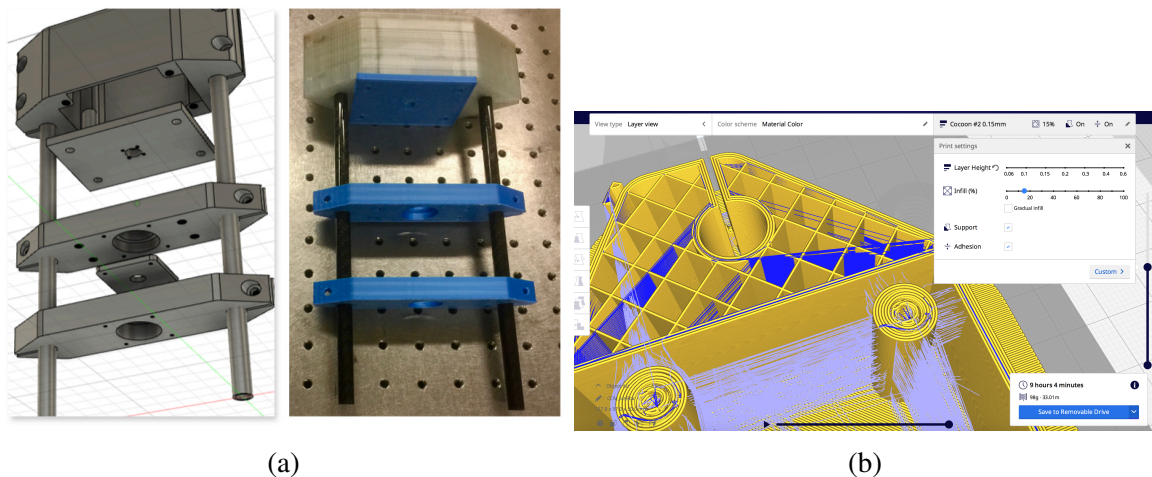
a) CAD model and 3D printed optical mounts. b) Fill factor specification during 3D printing.
